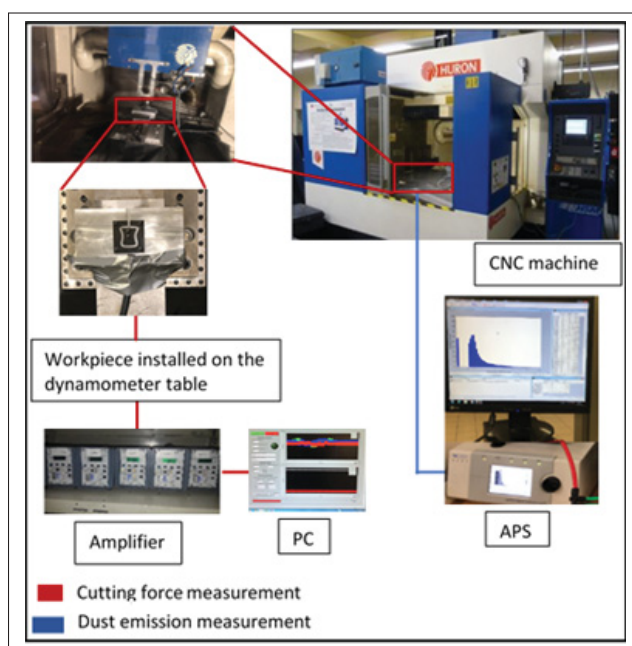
Photographs showing setup for machining CFRP and measurement system, and shape and geometrical dimensions of workpiece used in this study
